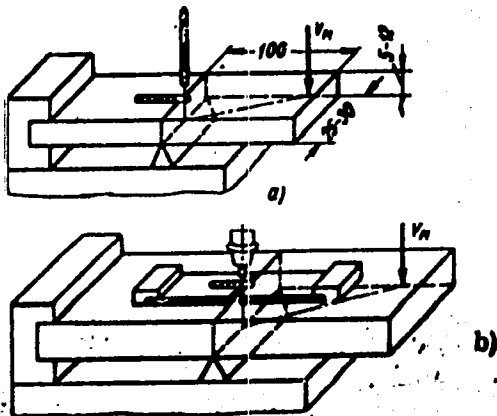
Schematic representation of testing in the IMET-TSNICHM machine during consumable-electrode welding of composite test specimens (a) and argon-arc tungsten-electrode welding of continuous test specimens (b)
